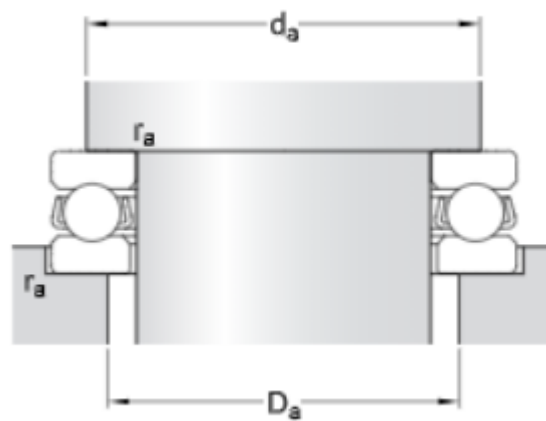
Abutment and radius bearing specifications (SKF 2021)
